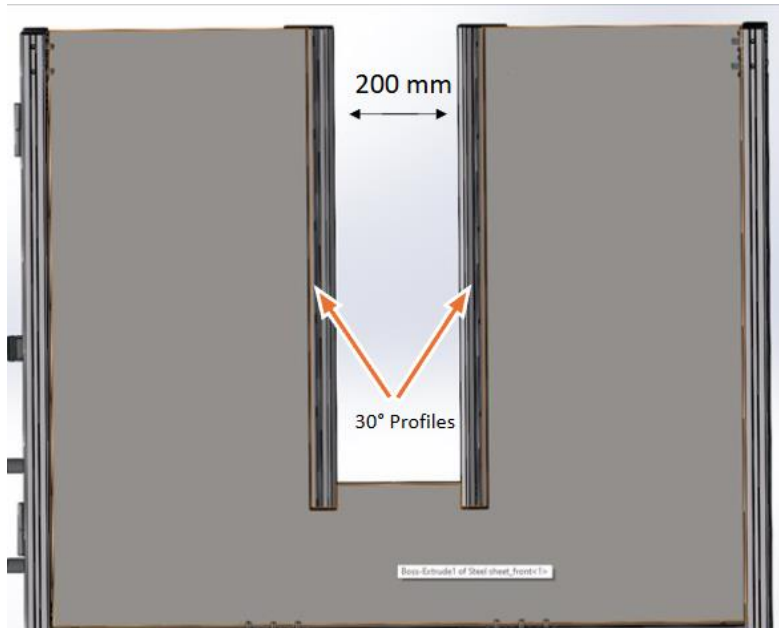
Front panel with opening for robot arm and angled brush seal supports.
